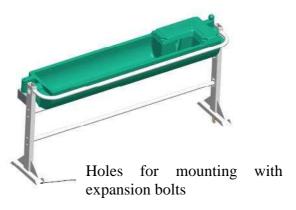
Places for mounting the structure to the floor. (mounting holes)
